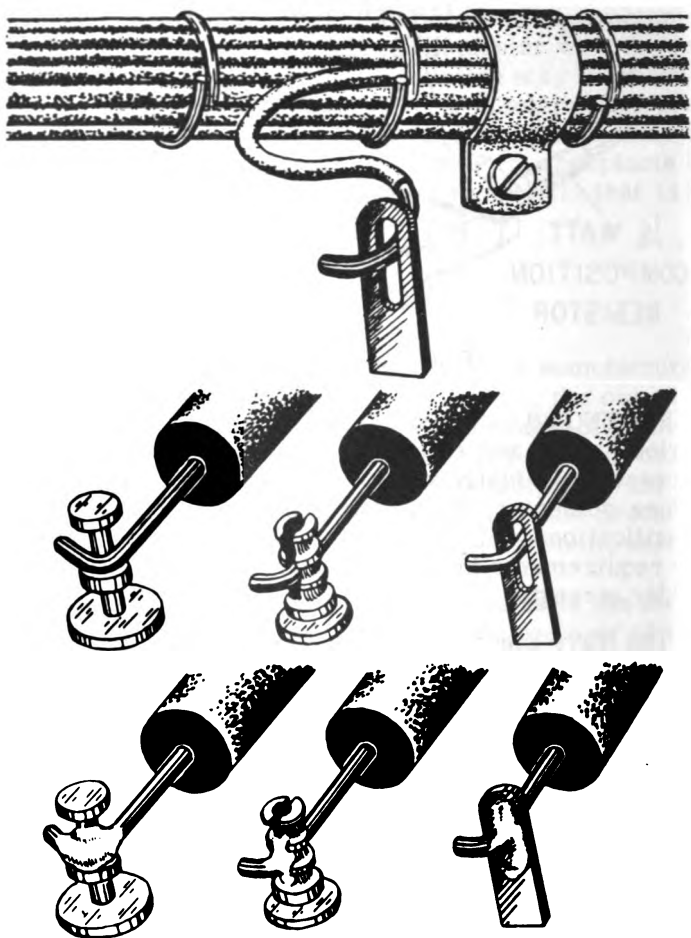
Soldering method recommended by Navy Electronics Laboratory.
